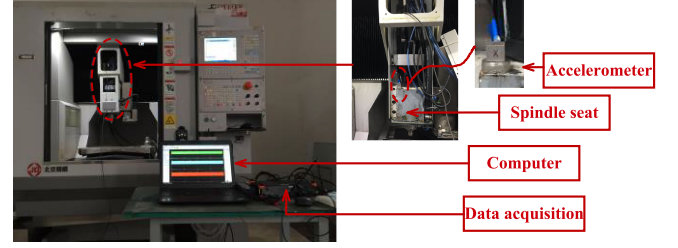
Cutting tools experimental setup for ultraprecision machining.
